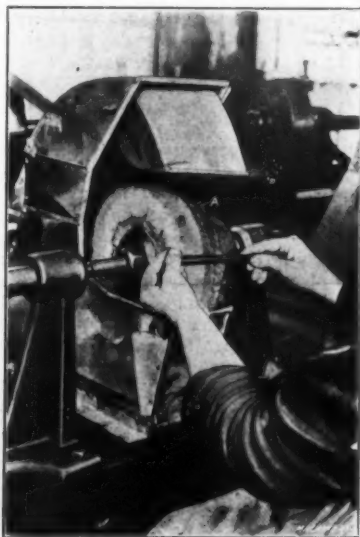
Finish-polishing the Rubber Pen Parts, on a Rouge-covered and Dry Buff.
